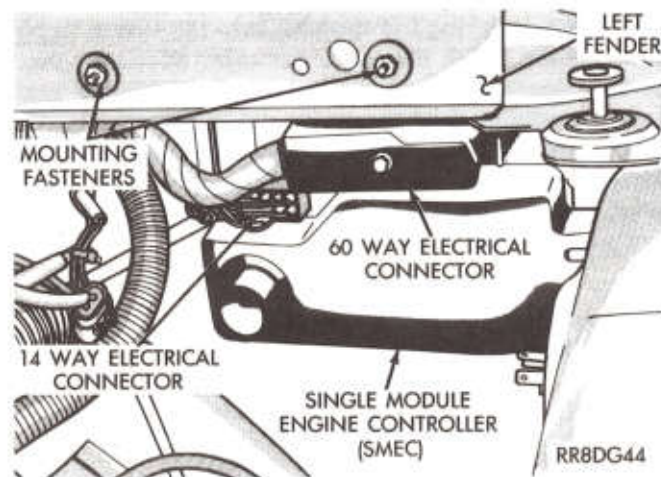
Servicing the Single Module Engine Controller (SMEC)
